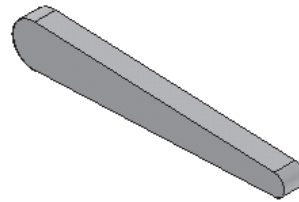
Resulting cutout created by removing the material outside the sketch
